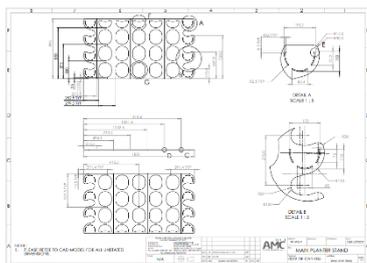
Drawing - 0022-DE-CAD-005 - PLANTER STAND pg1
